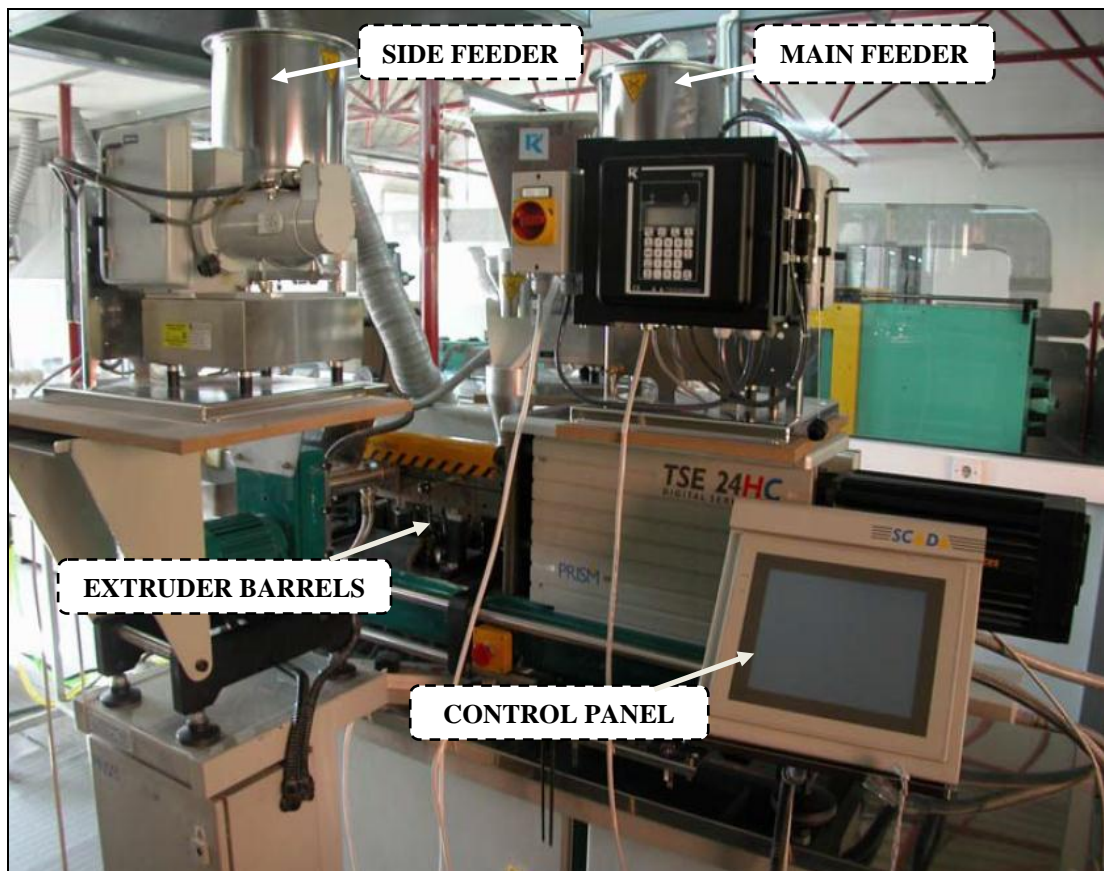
PRISM TSE24 HC extruder with gravimetric feeder.
